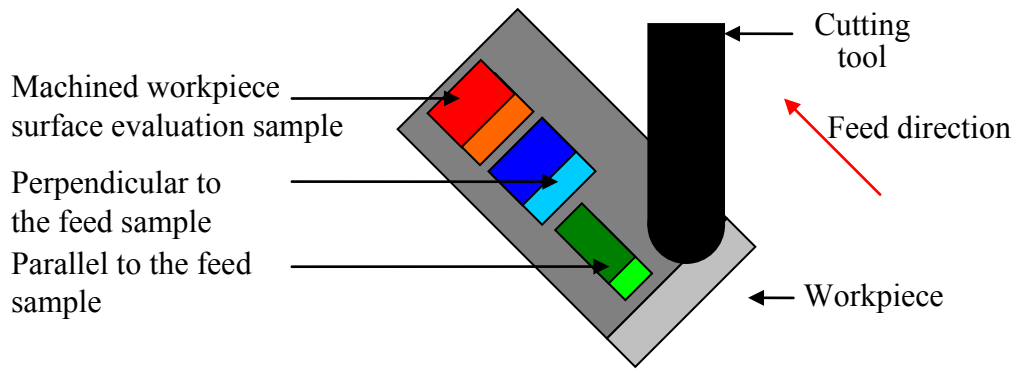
Schematic showing location and nomenclature of samples used for high speed milled workpiece surface integrity assessment
